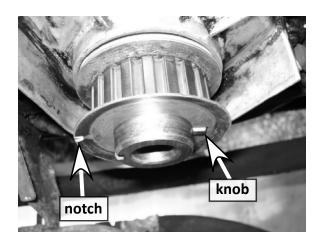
Put on the rear crankshaft shim, crankshaft pulley boss (with knob showing in front), and front crankshaft shim, as shown. The pulley boss has a ridge (see Figure B8) that aligns to the groove in the crankshaft. Remember, the concave sides of the shims face away from the timing belt (otherwise the shims will rub against the belt). Also note that the u-shaped notch (arrow, for aligning TDC) of the front shim is opposite the knob (arrow) on the pulley boss.
